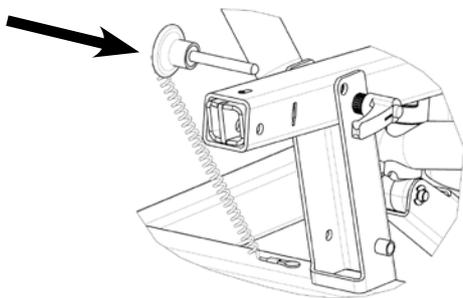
Zoom in of the insertion of the magnetic locking shaft in its folded position hole
